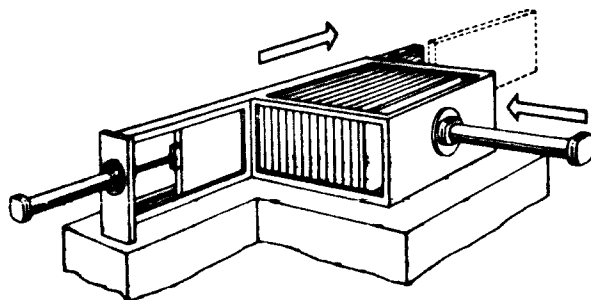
Adjustable hopper side feed onto machining bed and end-feed into machining position. Two pneumatic cylinders are used.
